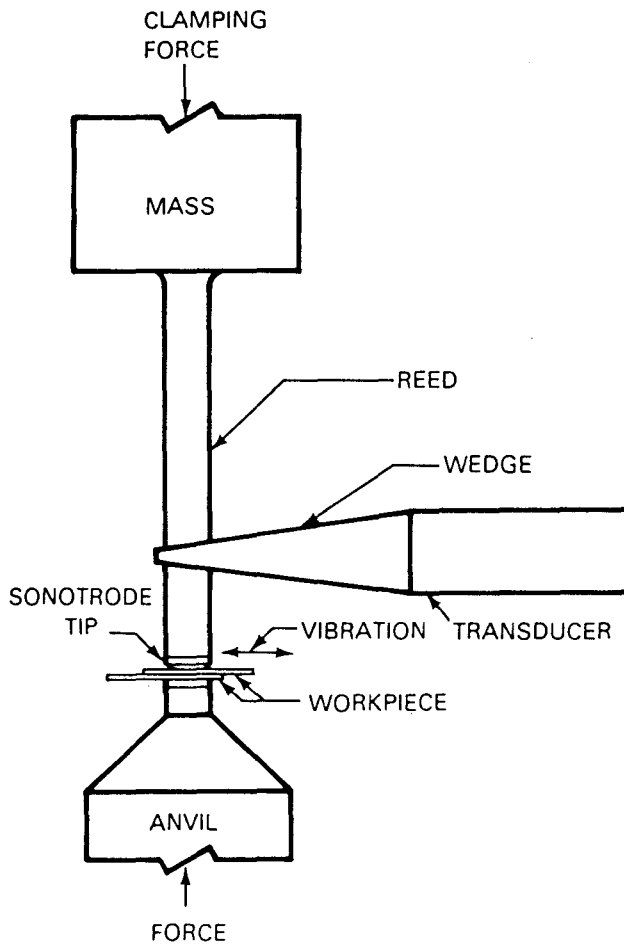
Wedge-Reed Ultrasonic Spot Welding System
